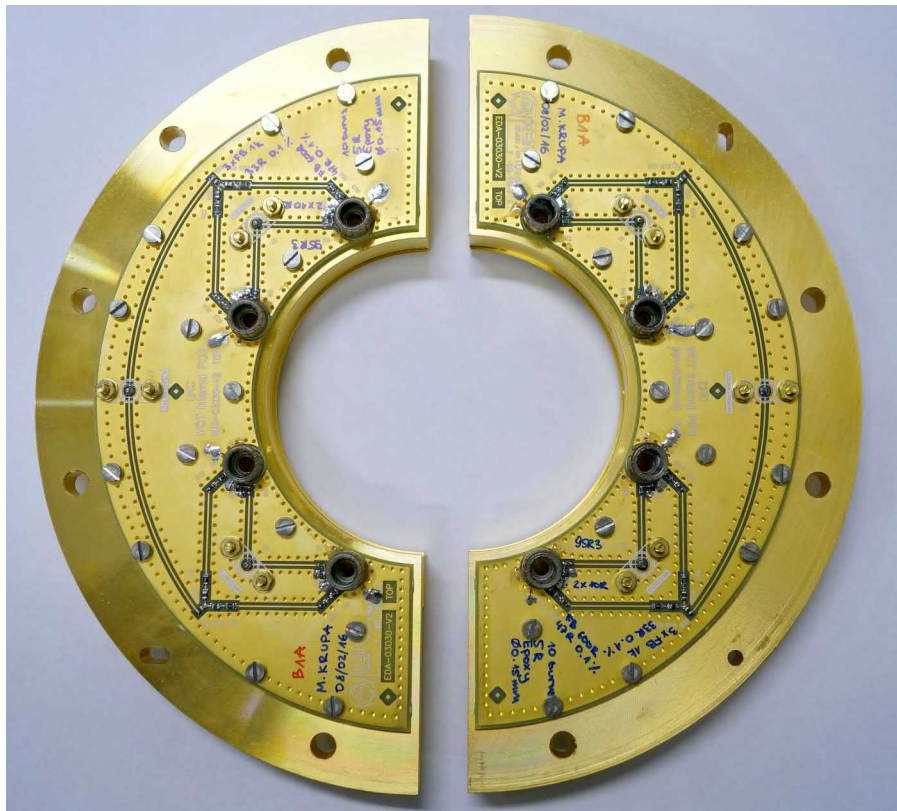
Internal WCT PCBs with four RF transformers each.
